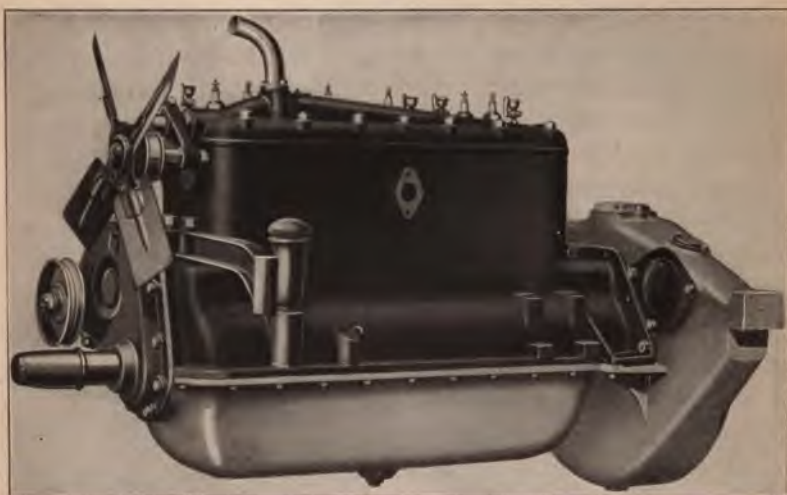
Showing block casting of a 6-cylinder automobile engine
